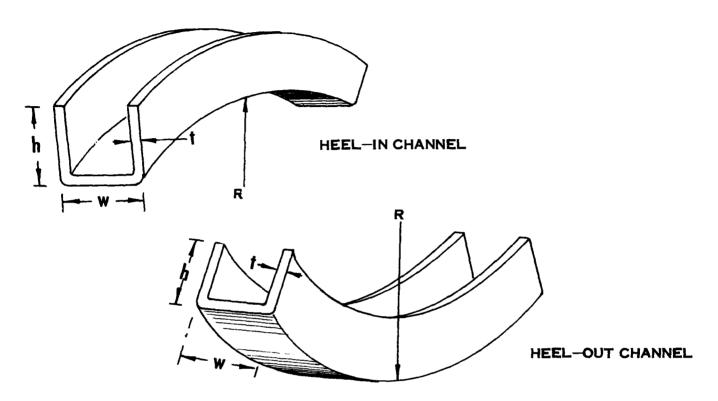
LINEAR ROLL HEEL-IN AND HEEL-OUT CHANNELS
